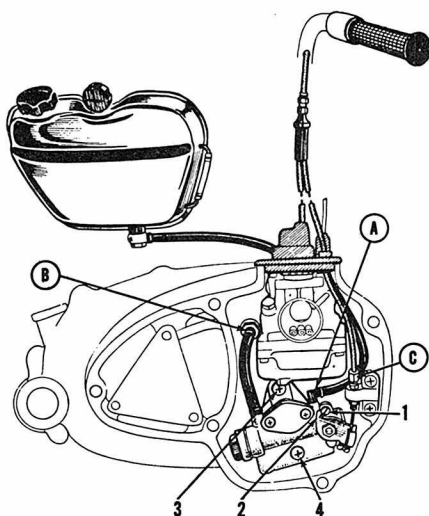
Drawing of "SUPERLUBE" oil injection. Refer to text for adjusting.
